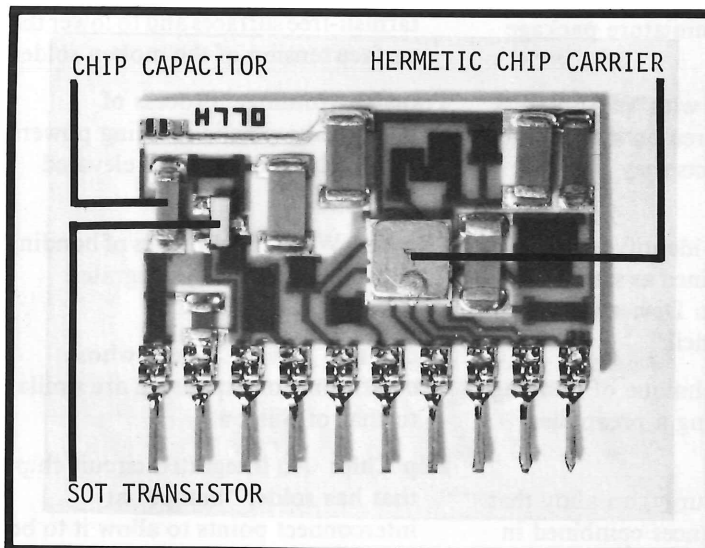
Hybrid Circuit Engineering designed and assembled this hybrid to demonstrate that any combination of SOT's, SO IC's, chip carriers and chip capacitors can, using solder reflow, be assembled in a single operation.
